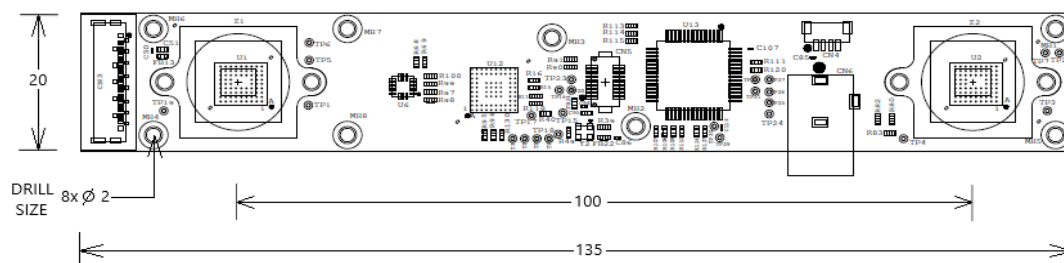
STEEReoCAM Camera Board Mechanical Dimensions
